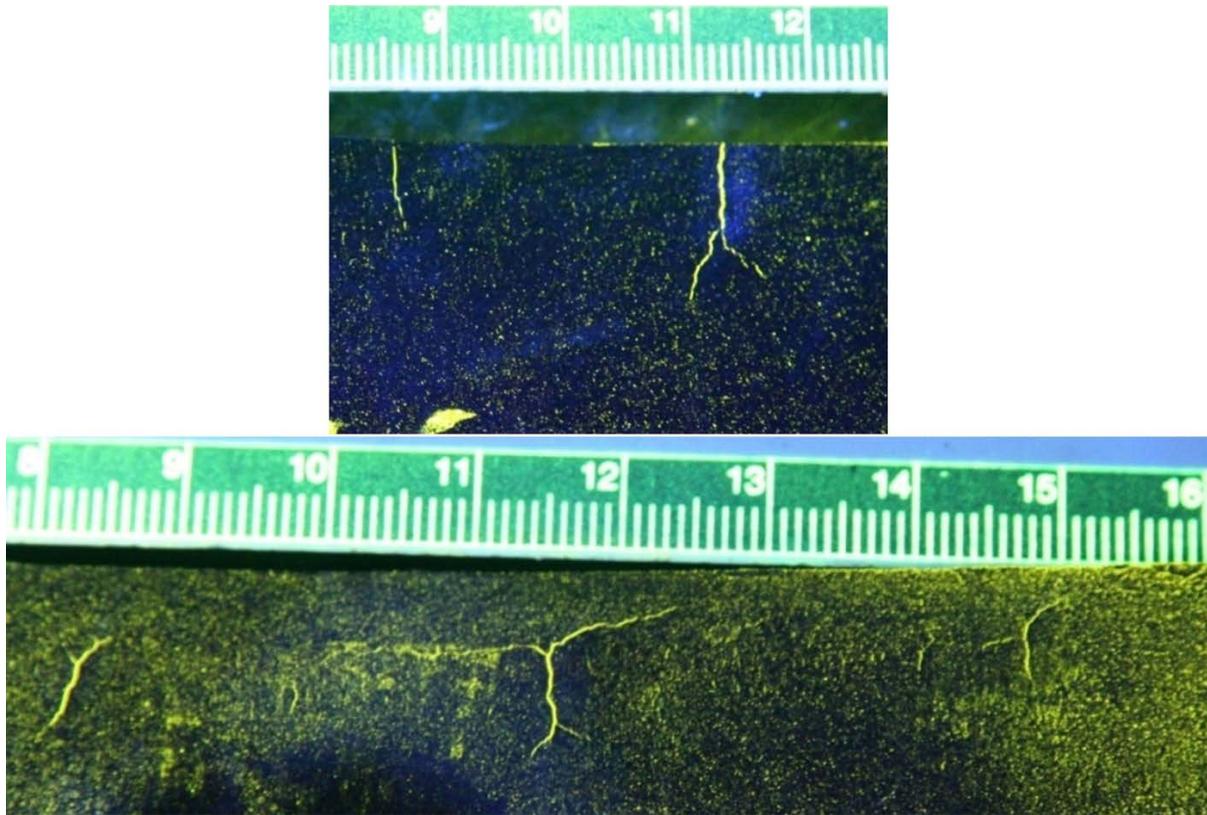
Photograph. Magnetic particle-highlighted examples of crack branching in nurse tank SCCs. Finest divisions on the scales shown are millimeters.
